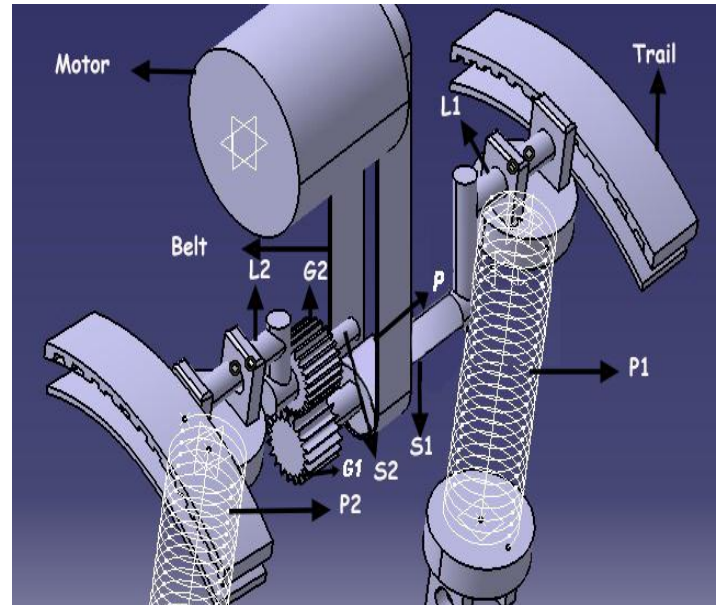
Isometric View of Motor, Gear and Spring Assembly
